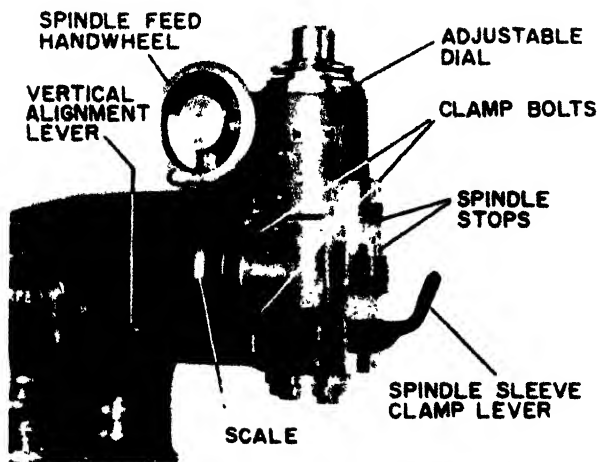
The head of the vertical milling machine with its parts identified. (*The Brown & Sharpe Manufacturing Company*)
